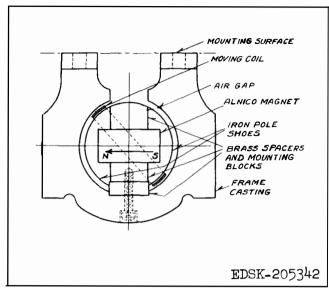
Schematic Drawing of Magnetic Circuit of Type DT-3 Relay (Top View). Moving Coil Bearing Supports, Springs and Contacts Omitted.
